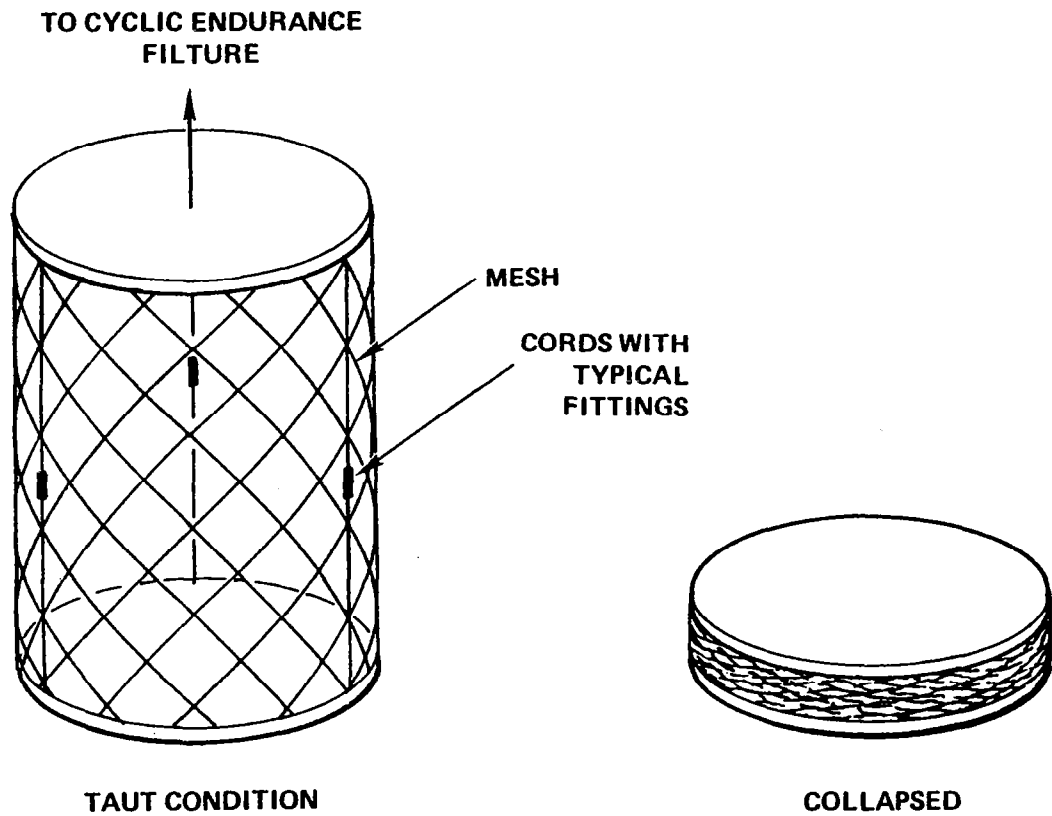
Mesh-Cord Assembly Endurance Test
